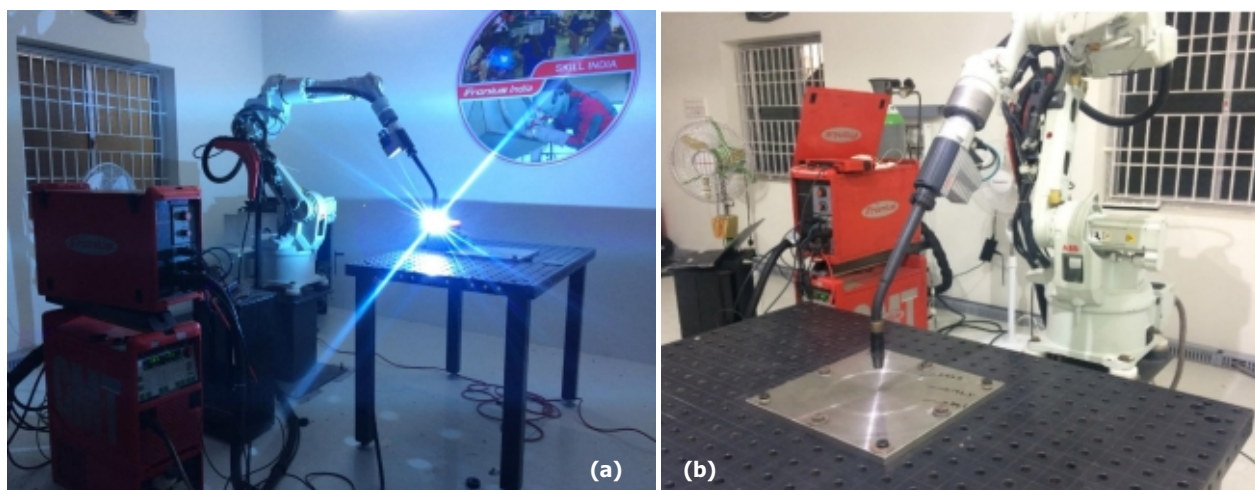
(a) WAAM setup; (b) Component welding
